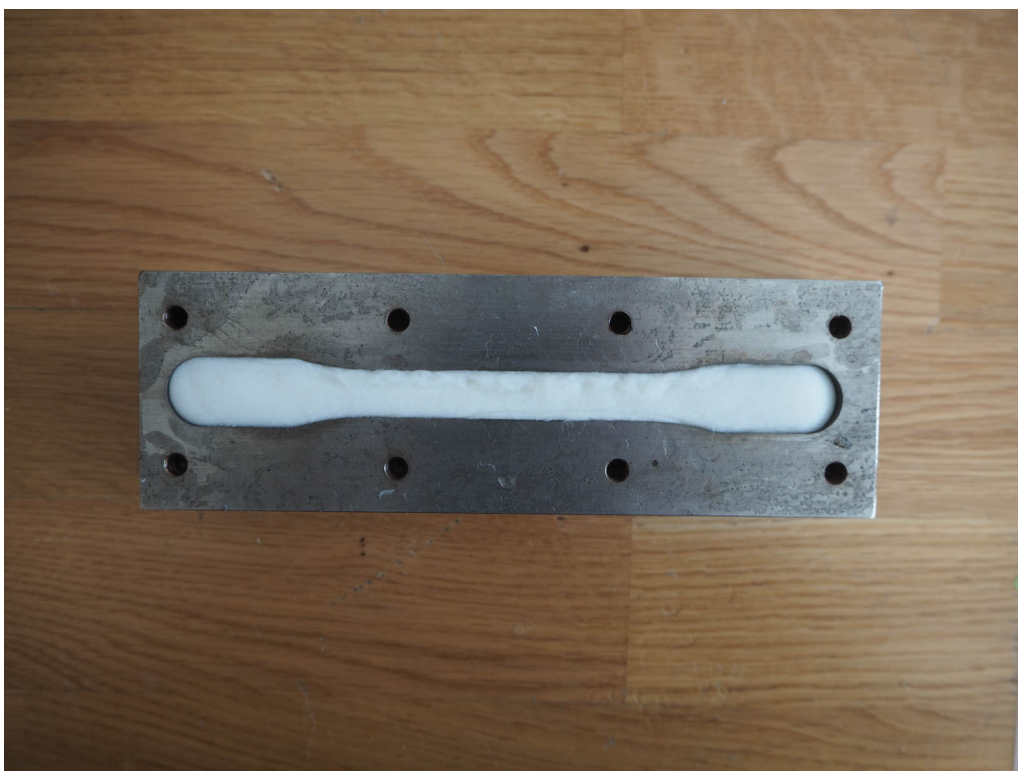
Filtered sample: This is the bottom view of a properly filtered sample. The sample is now ready to be moulded
